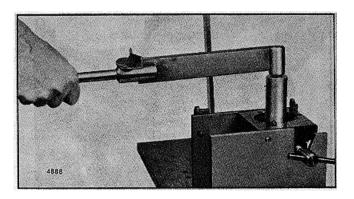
Tightening Injector Nut With Torque Wrench using Tool J 4983-01
